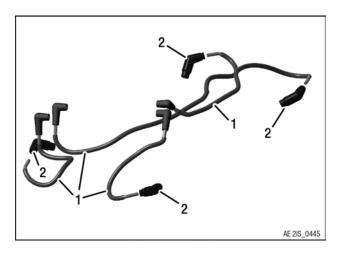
Ignition cables (uncommon - old, plugged version)
